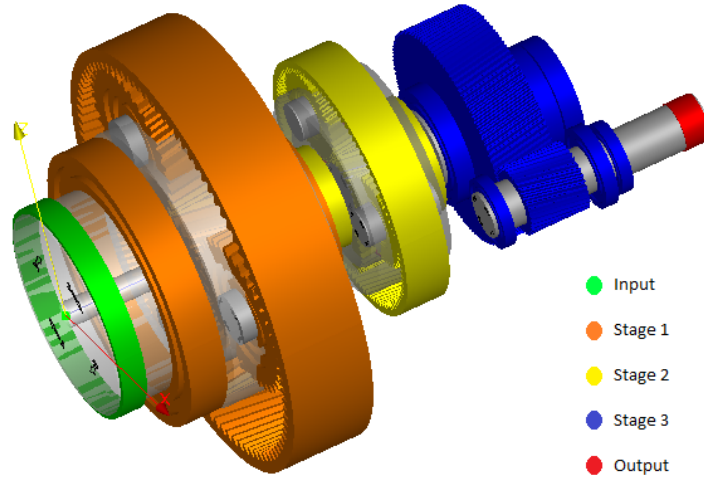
3D schematic model of a wind turbine gearbox [176].
